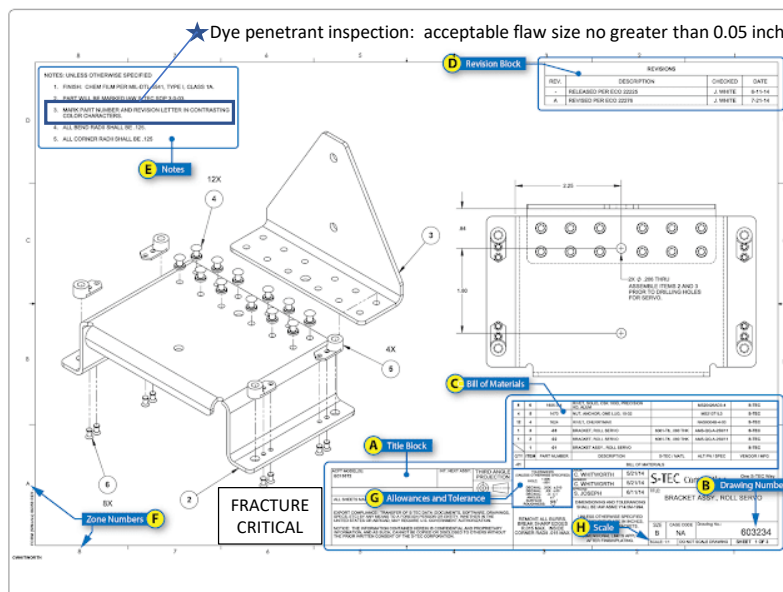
Drawing for a Fracture Critical Part with a Note Providing the Expected Inspections and Associated Acceptable Flaw Size
